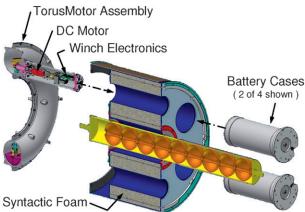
Cutaway view of the neutrally buoyant winch drum assembly showing how the torus motor, winch electronics, and battery packs are mounted.
